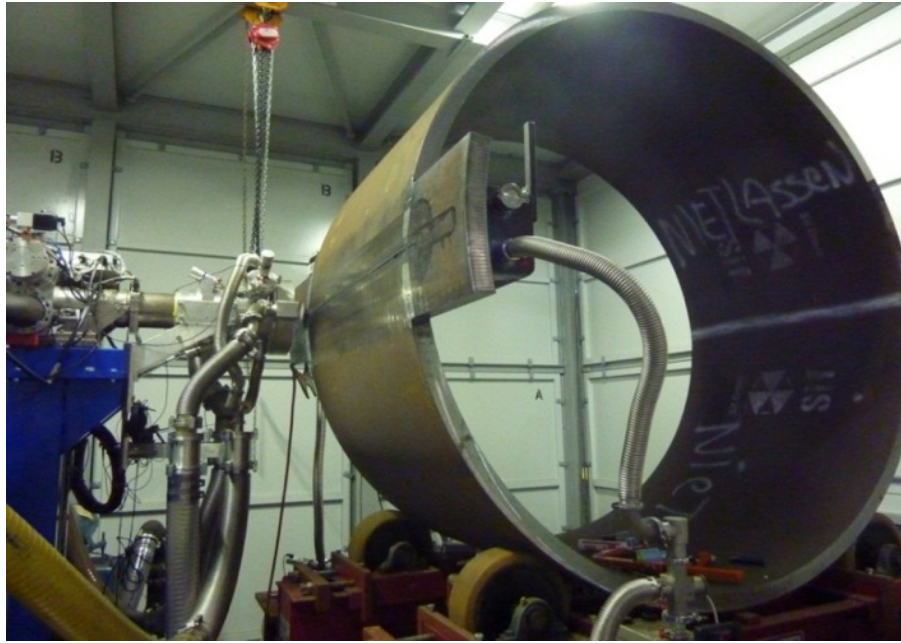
Local vacuum EB welding with sliding seal (TWI Ltd.)
